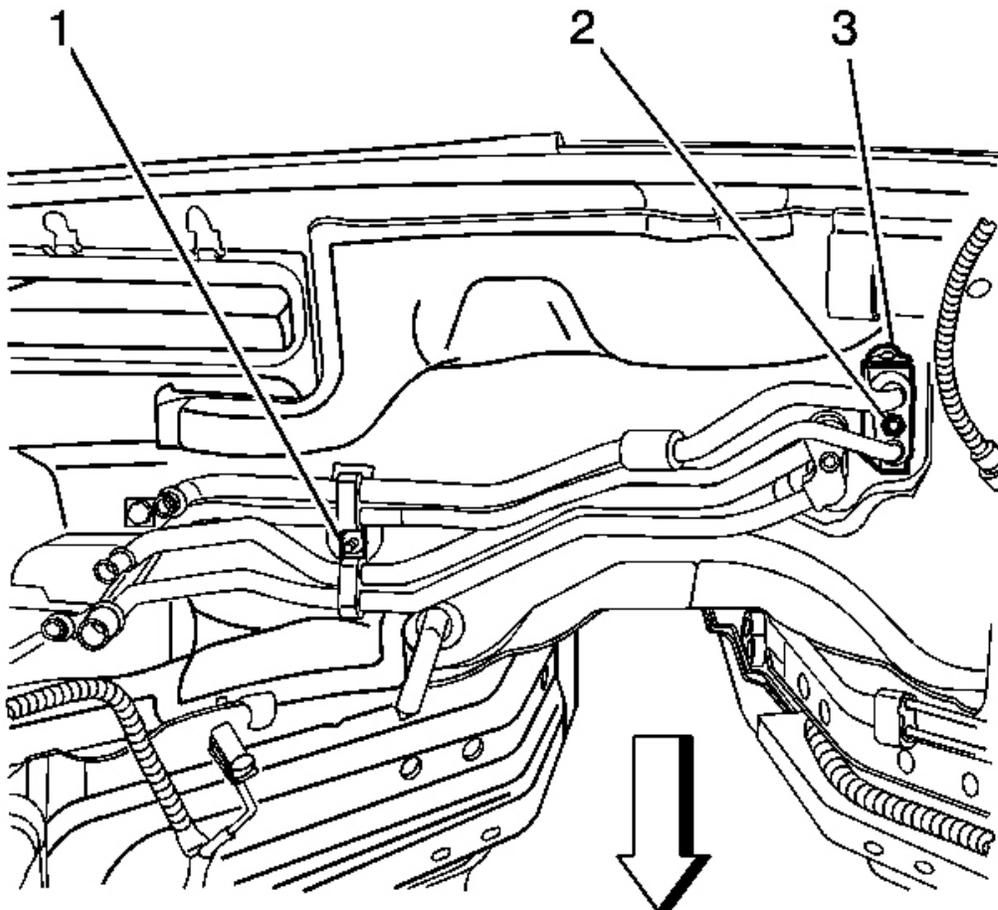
Identifying Heater Pipe Bracket Retaining Nut, TXV & TXV Block Fitting Nut
